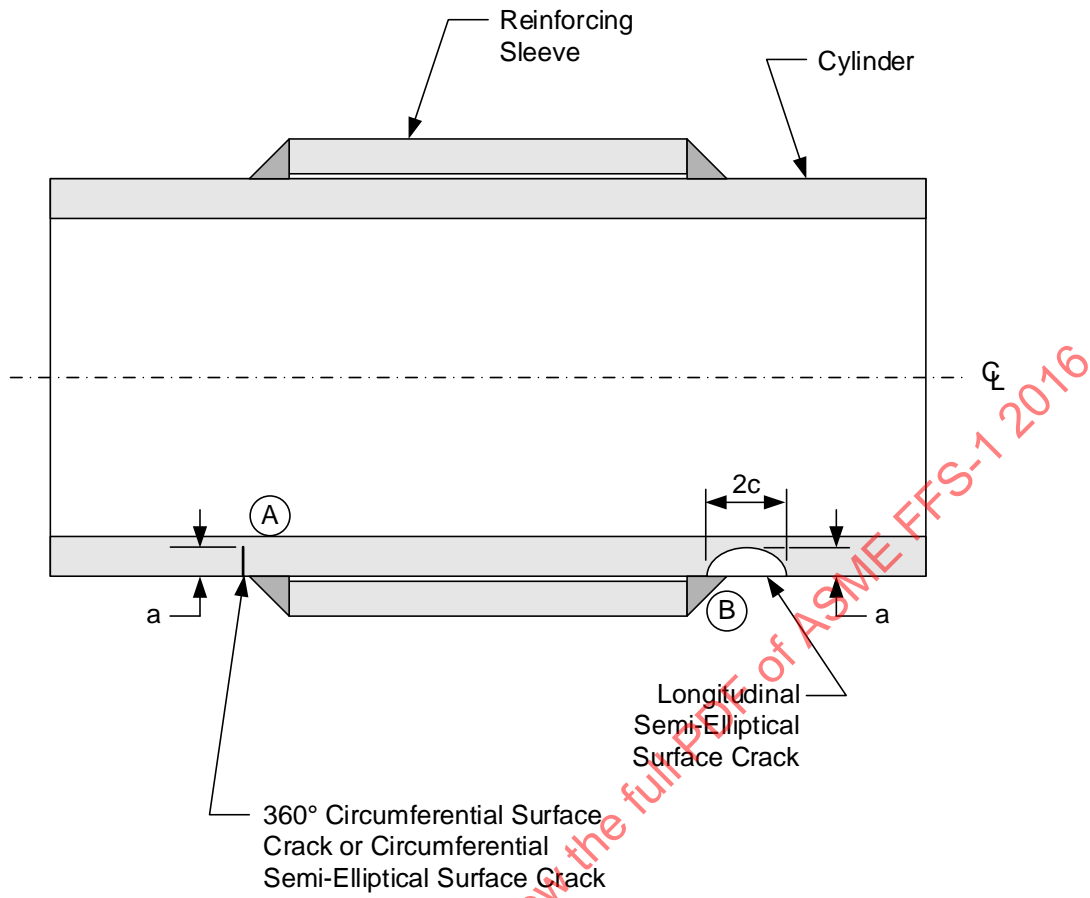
B.29 – Cracks At Sleeve Reinforced Cylinders
